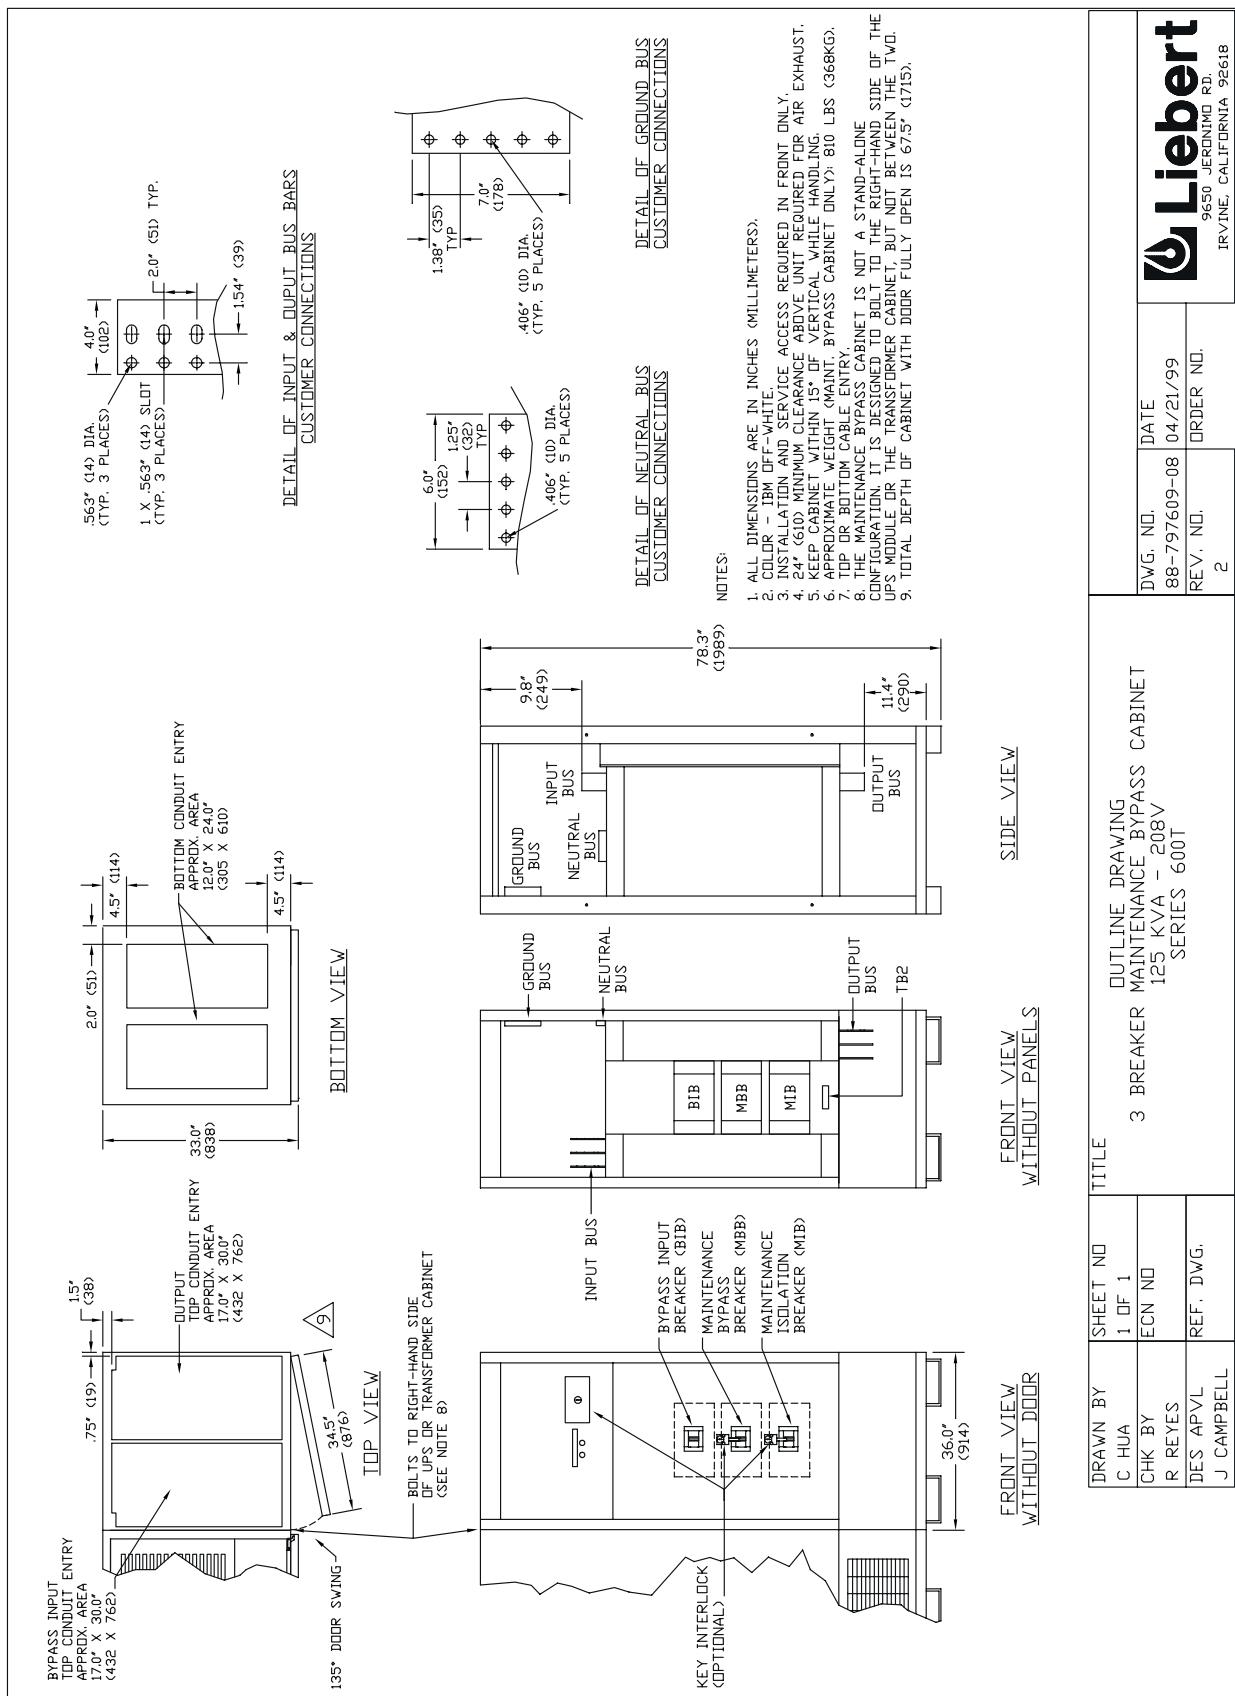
Outline Drawing, 3-Breaker MBC, 450 to 800 Amps
